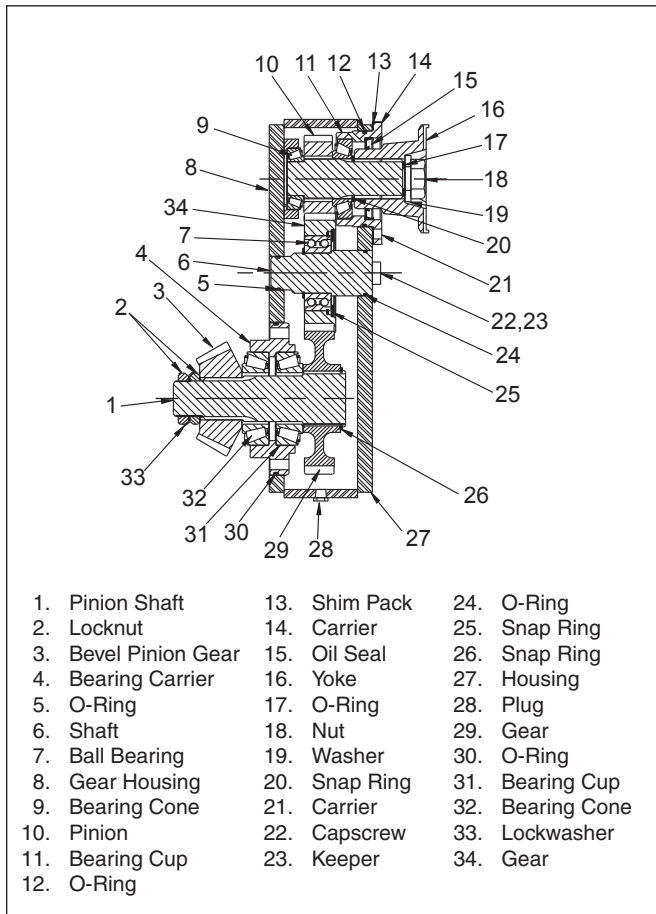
Gearbox on W6F for Komatsu D61EX-12 (K47) & D65EX-12 (K46)
